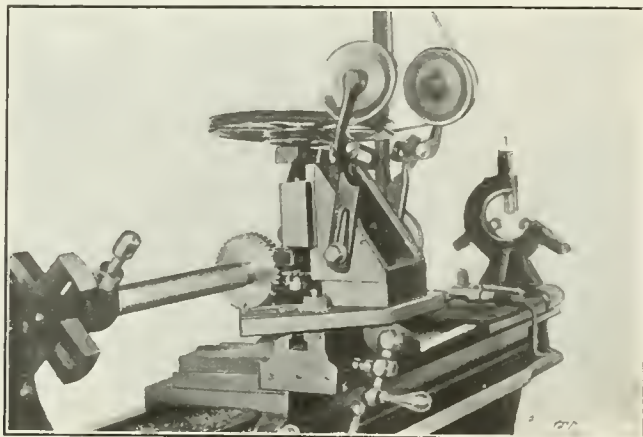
Drilling Spindle in Process of Gashing a Worm-wheel
